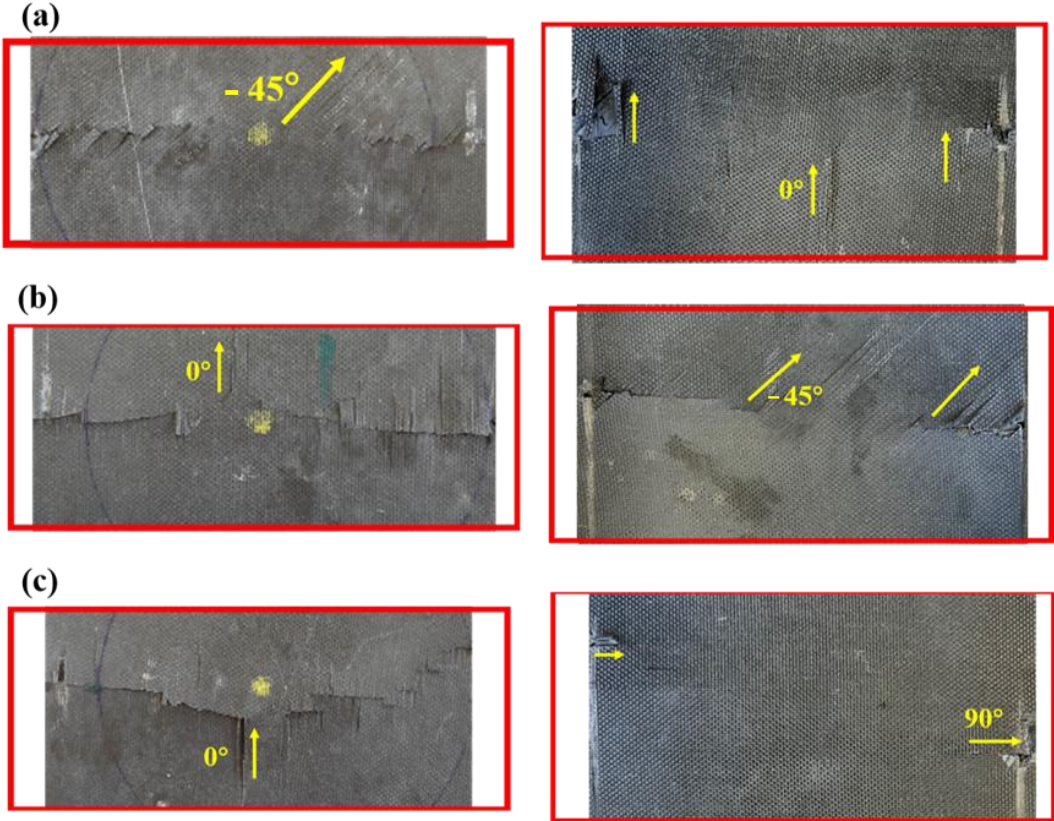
Details of fracture surfaces: (a) QIQH-1 (left: -45°; right:0°); (b) QIQH-2 (left: 0°; right: 45°); (c) QIQH-3 (left: 0°; right: 90°)
